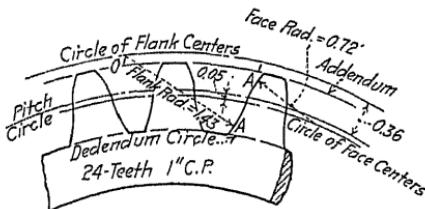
Drawing a cycloidal tooth by the Grant 3-point odontograph.
